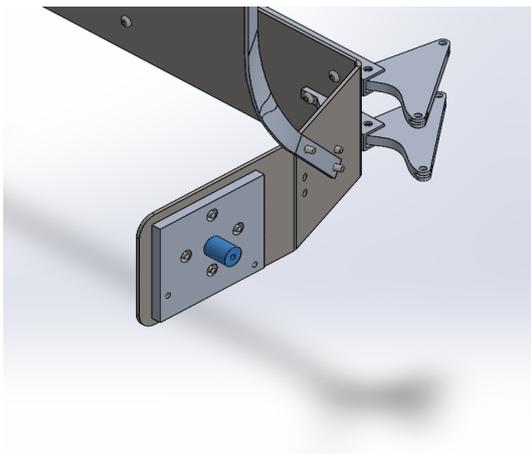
In blue: The aluminium axis of the hip joint created on the metal lathe.
